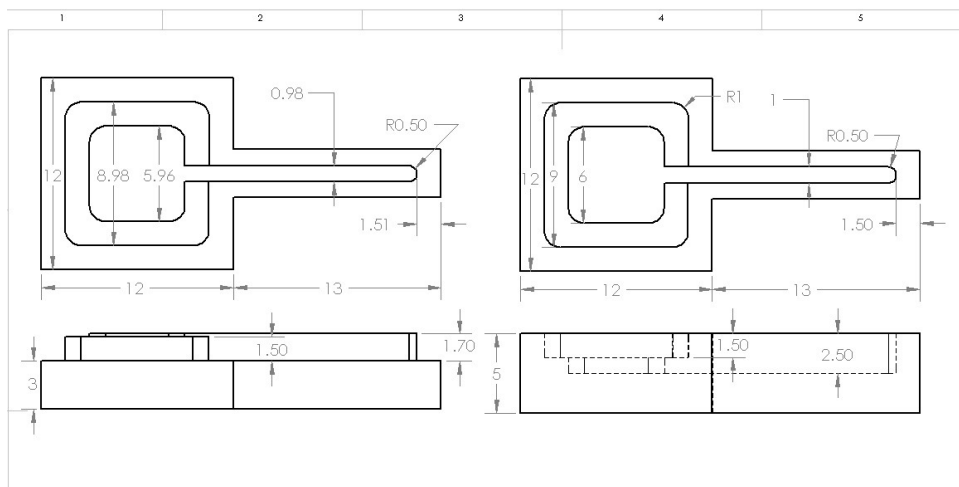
Optimized design for a non-electrical conductive package of smart parts.
